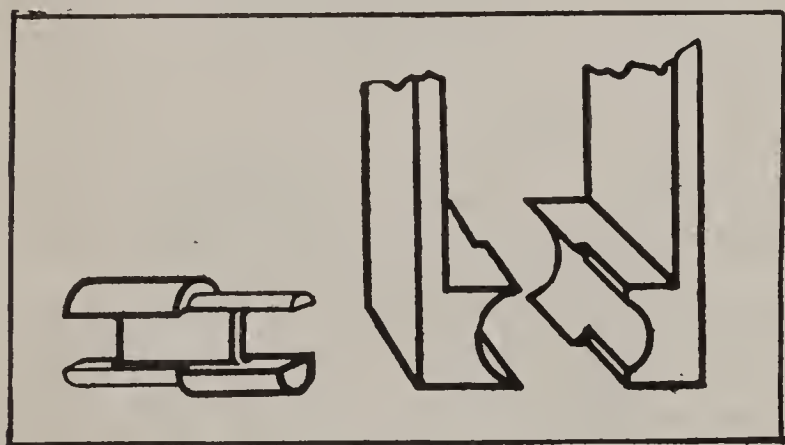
Arrangement of Pole Pieces and Armature in Some Magnetos Intended for Two Cylinder V Engine.
